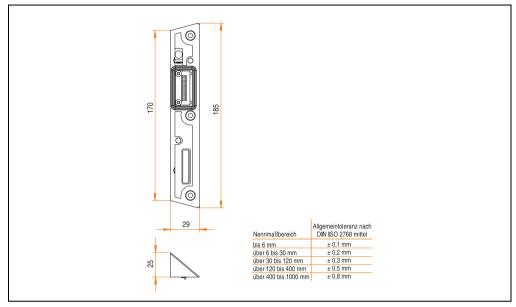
Dimensions - extension cover 5AC800.COV1-00
